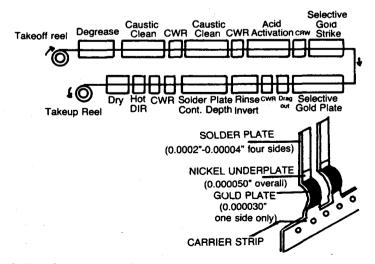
Typical process for nickel plating, gold striping, and solder plating a stamped connector contact.
